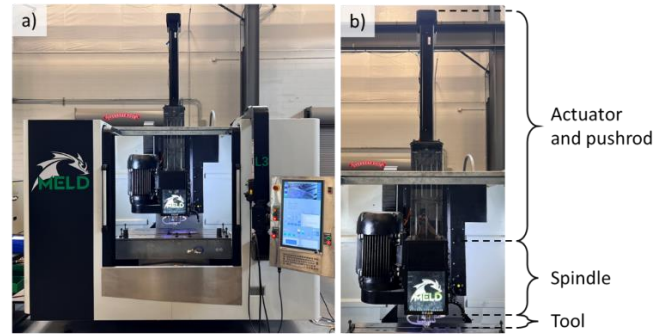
a) MELD Manufacturing L3 AFSD machine. b) Details for actuator and pushrod, spindle, and tool assembly.
